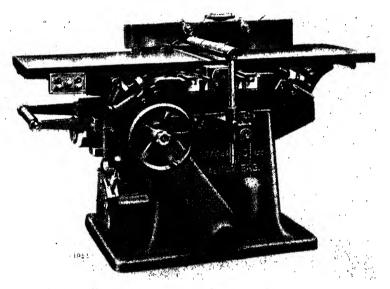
ELECTRICALLY-DRIVEN COMBINED SURFACING AND THICKNESSING MACHINE
